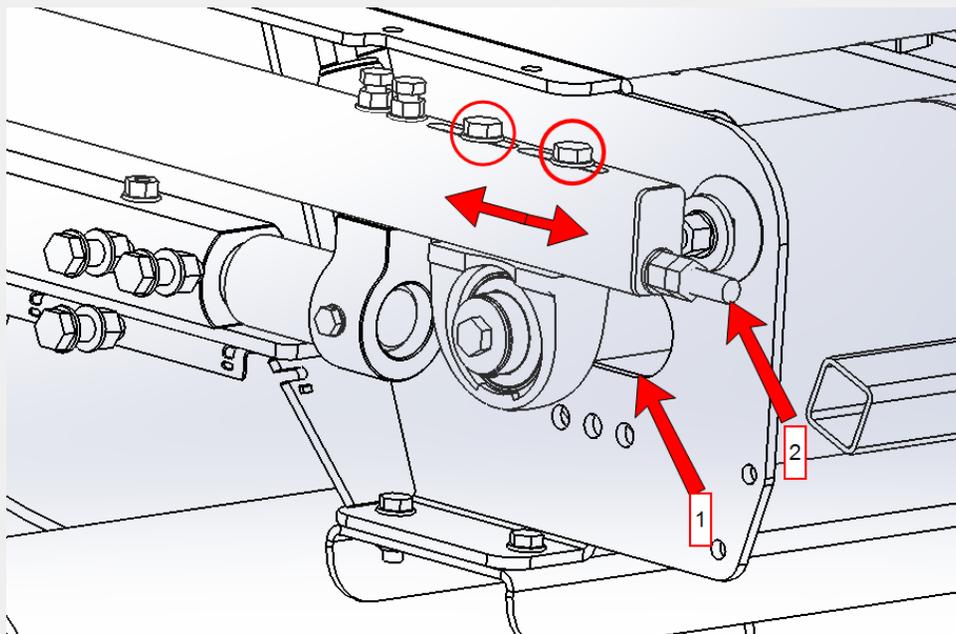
Adjusting belt tension on wrapping table with weighing cell
